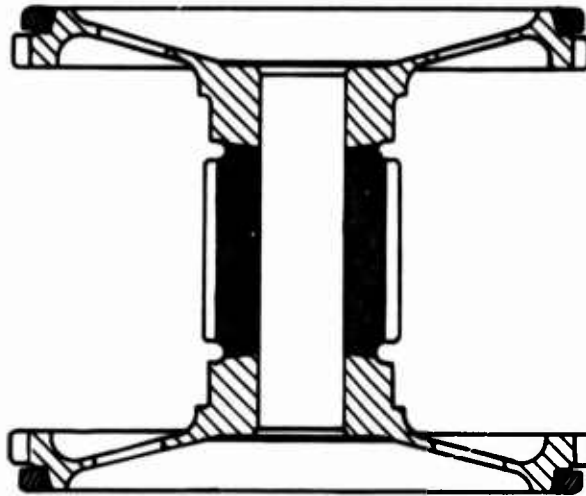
First-Row Pinion - Butt Weld Configuration.
